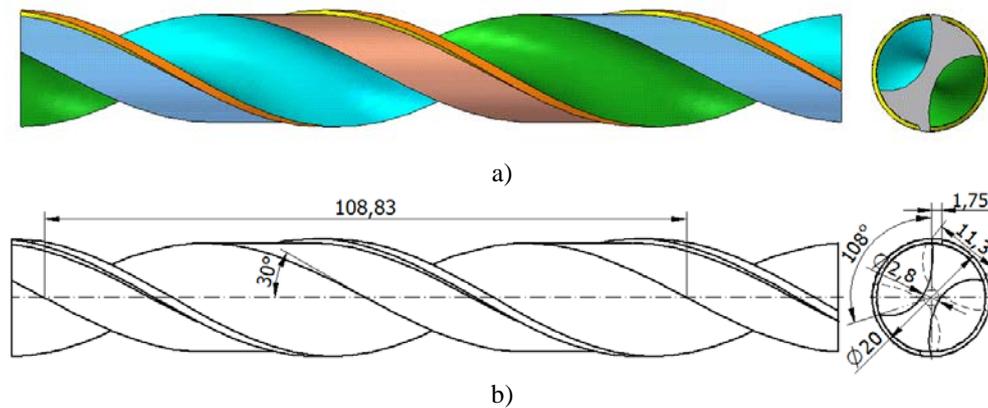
The 3D model and the drawing of the active part of the helical drill
